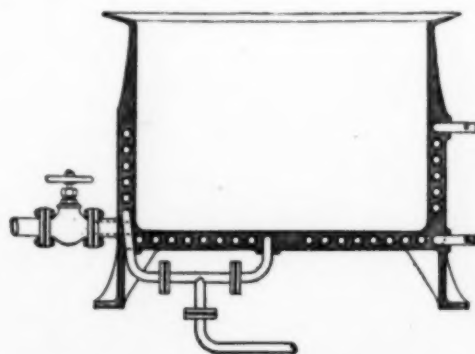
STEAM-JACKETED EVAPORATOR.
